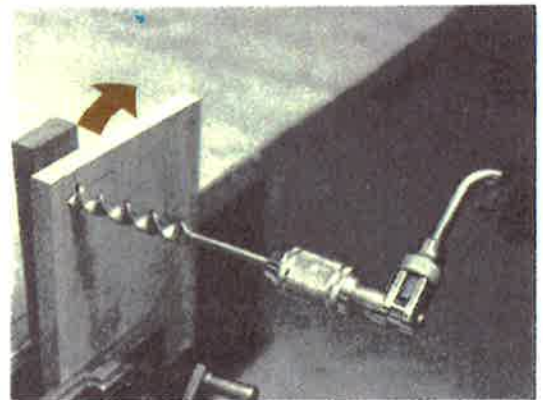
Boring a hole with the aid of a piece of scrap wood.
